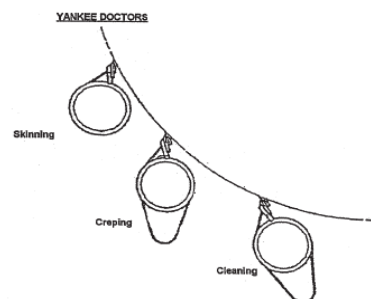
Cleaning, creping and skinning blades diagram^[1].
